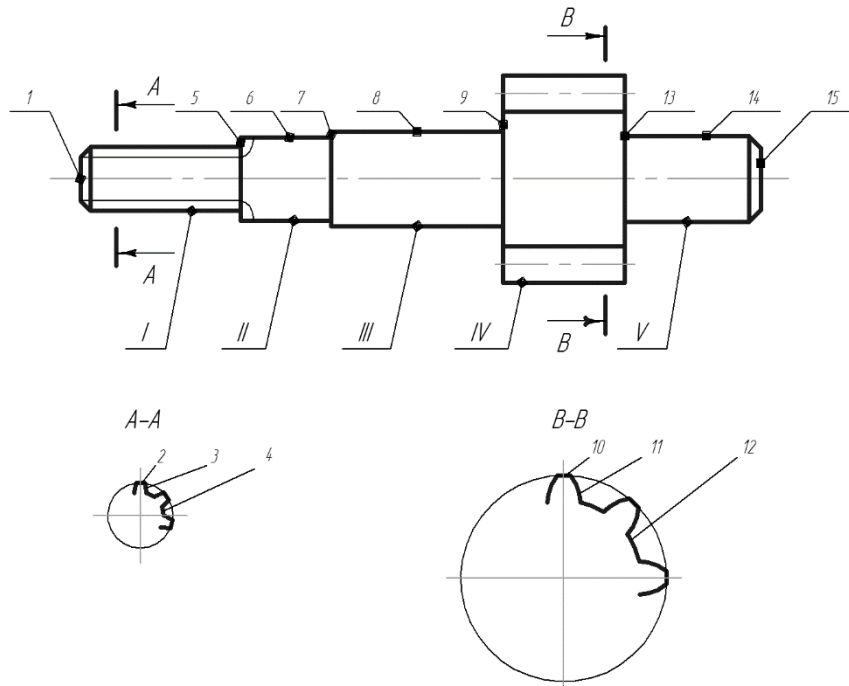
Structure of the part design: I-V – functional parts of the part; 1-15 – surfaces of the part
